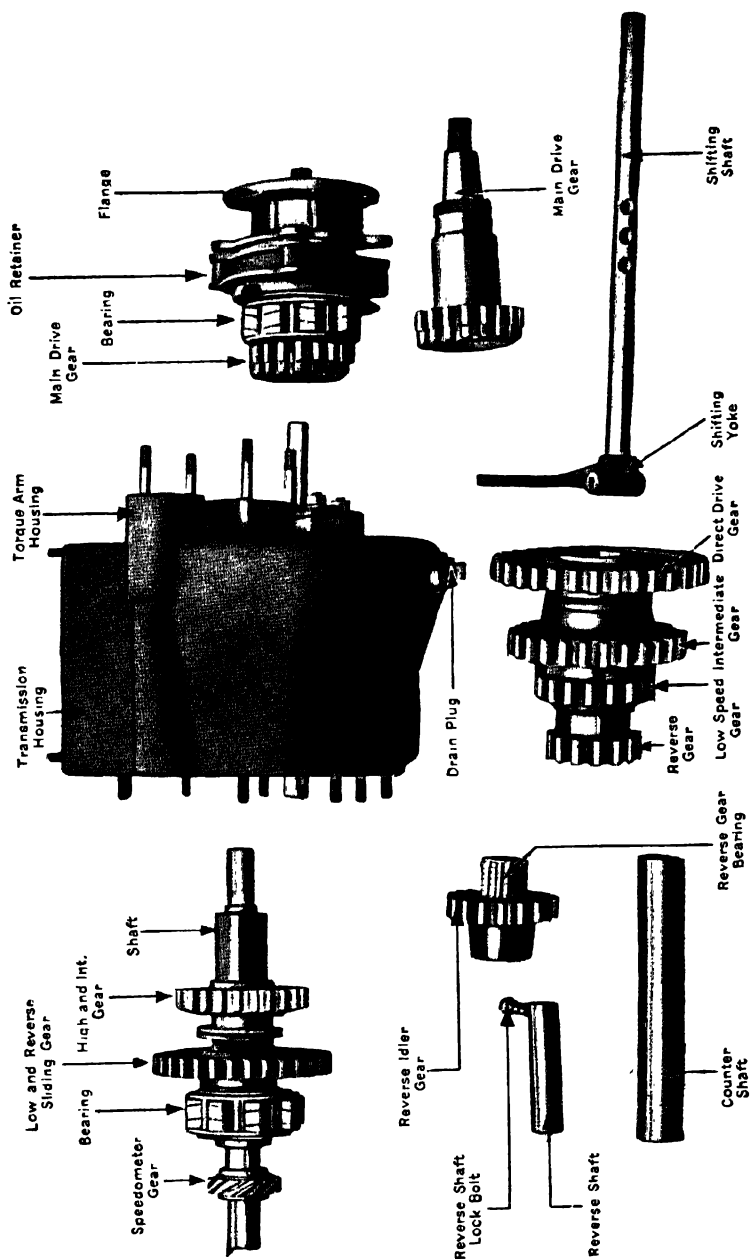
Sliding Gear Transmission Disassembled. (Marmon.)
